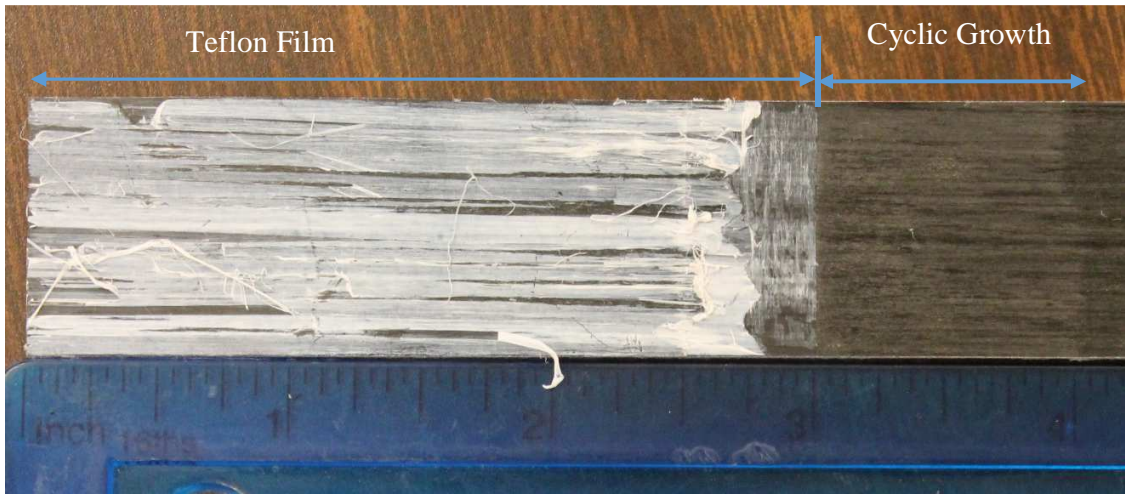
Fracture Surfaces of Typical ENF Fatigue Specimen.
